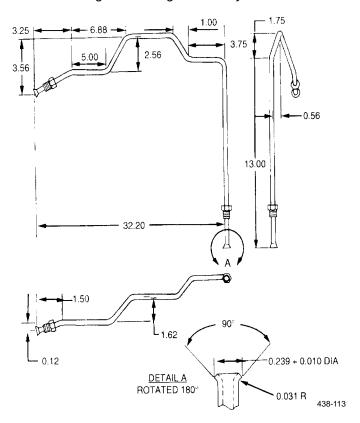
Hydraulic Brake Tube Assembly, Front (M101A3, M116A2E1, and M116A3)
